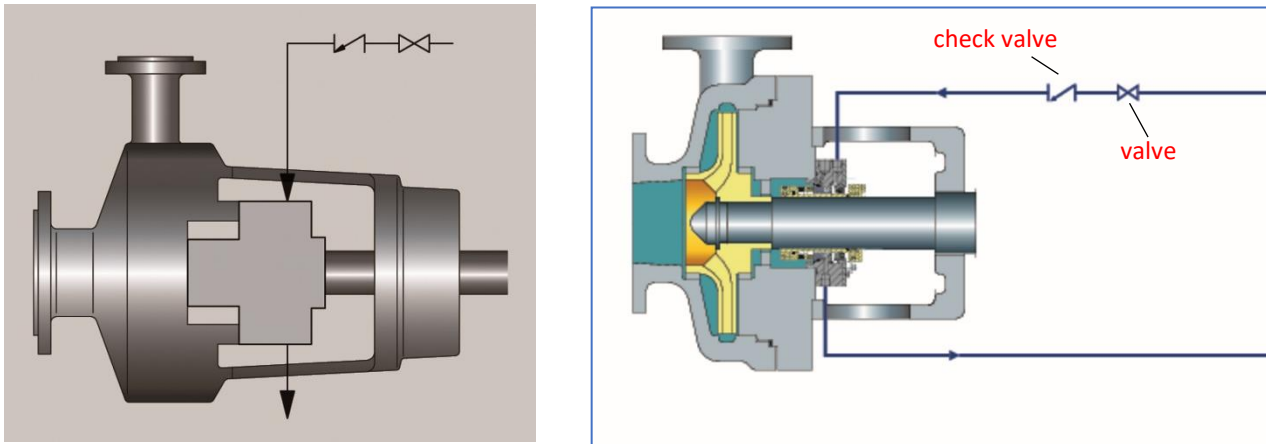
API-Piping-Plan 62 (schematic view and cross-sectional drawing), with check valve and valve
